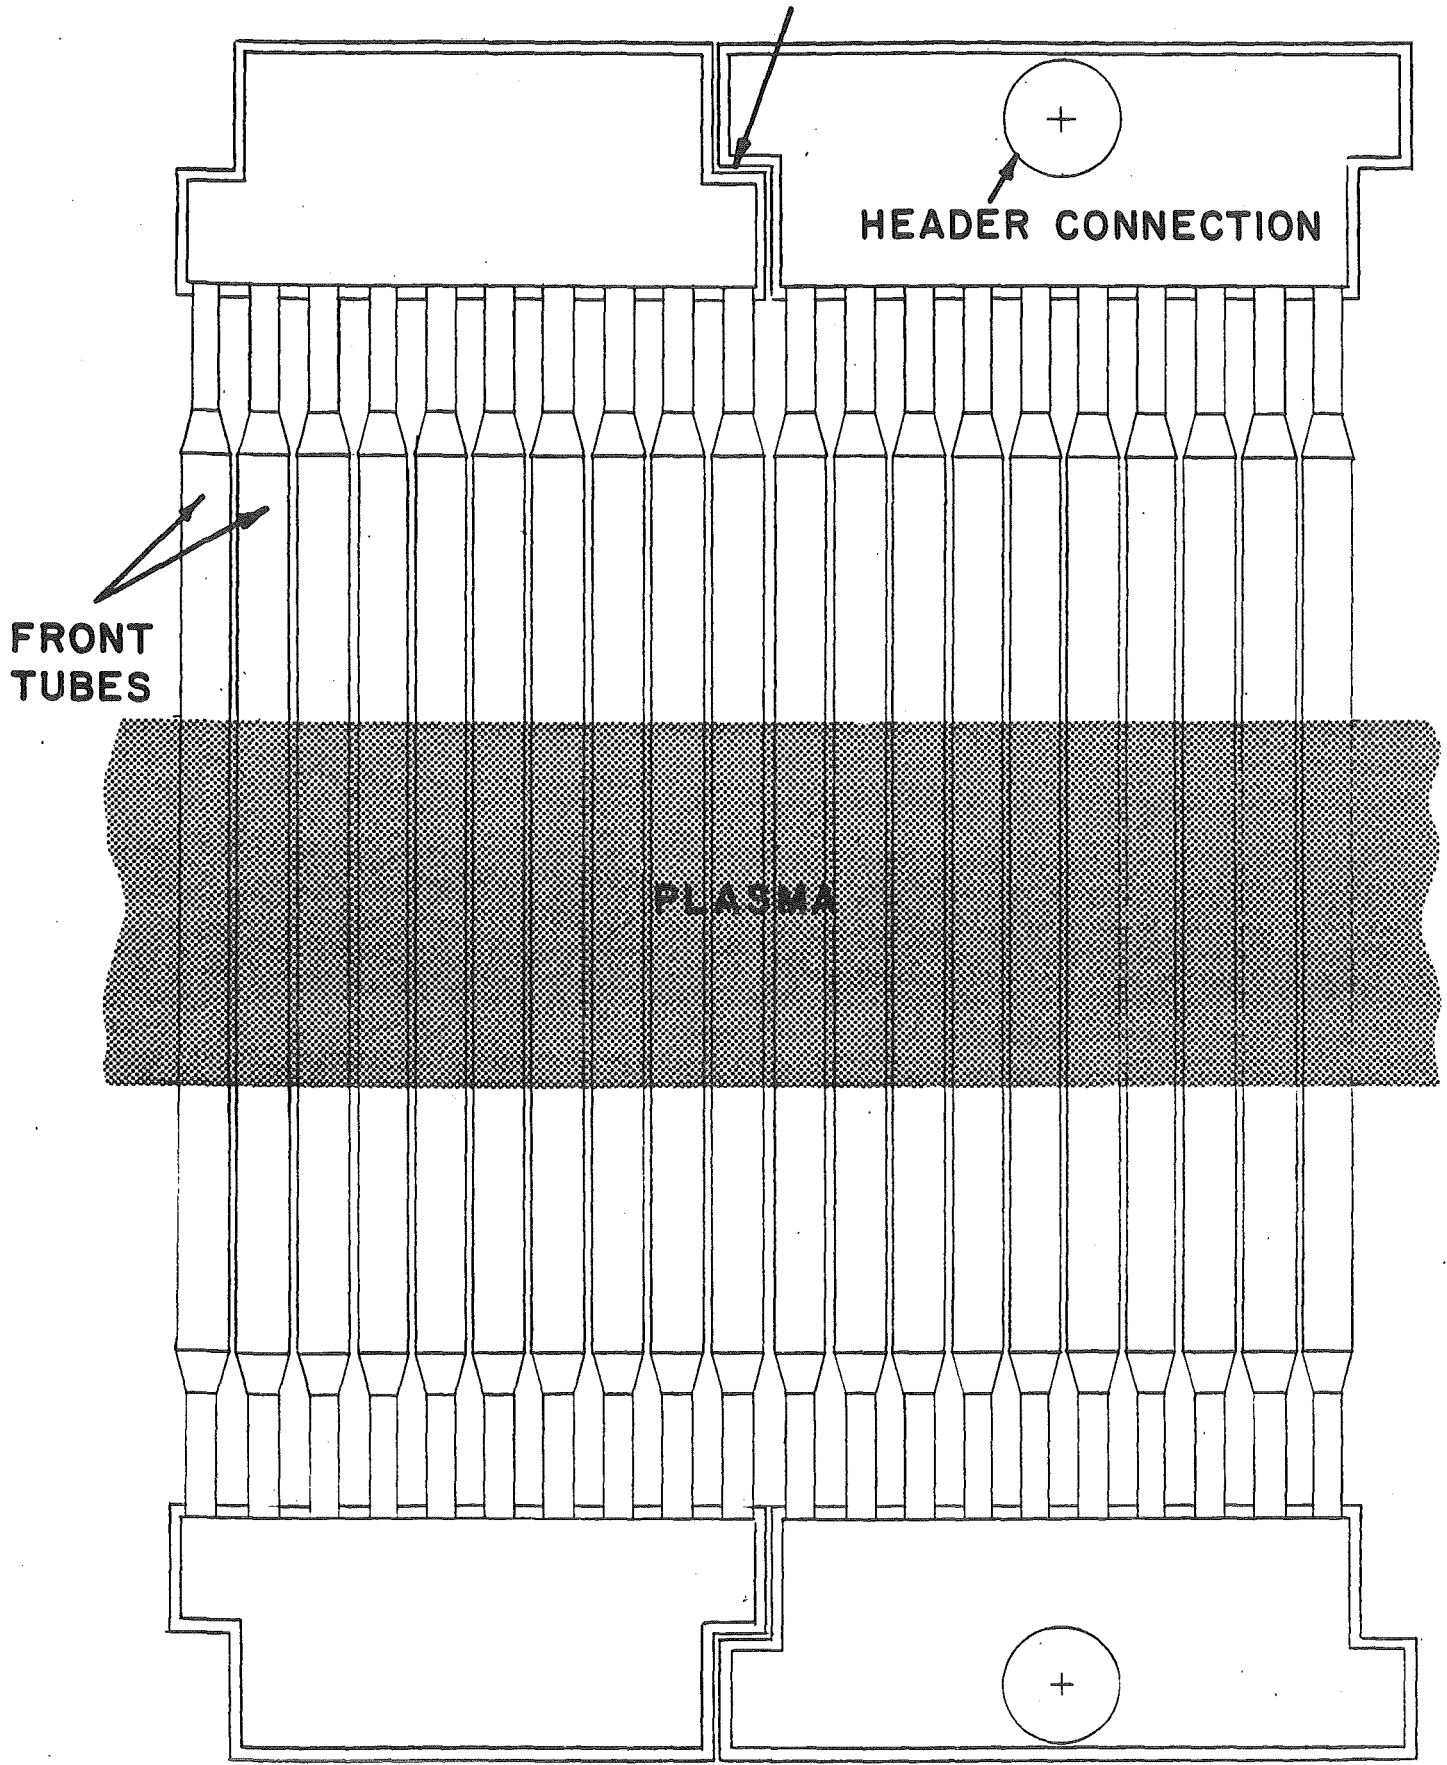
Vertical section in the axial direction showing manifold stepping.
